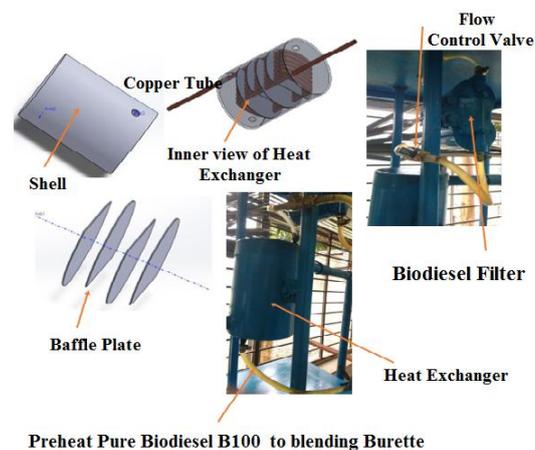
Three dimensional sectional and photographic view of preheating assembly device.
